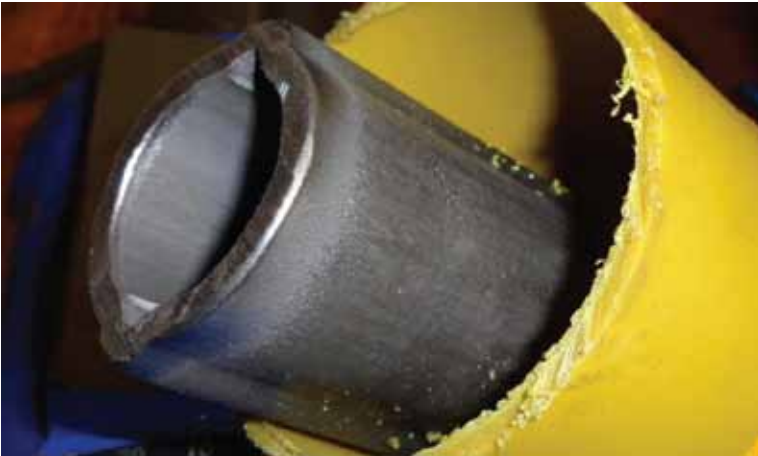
burrs removed with a file, grinder and power wire wheel, inside and outside.
